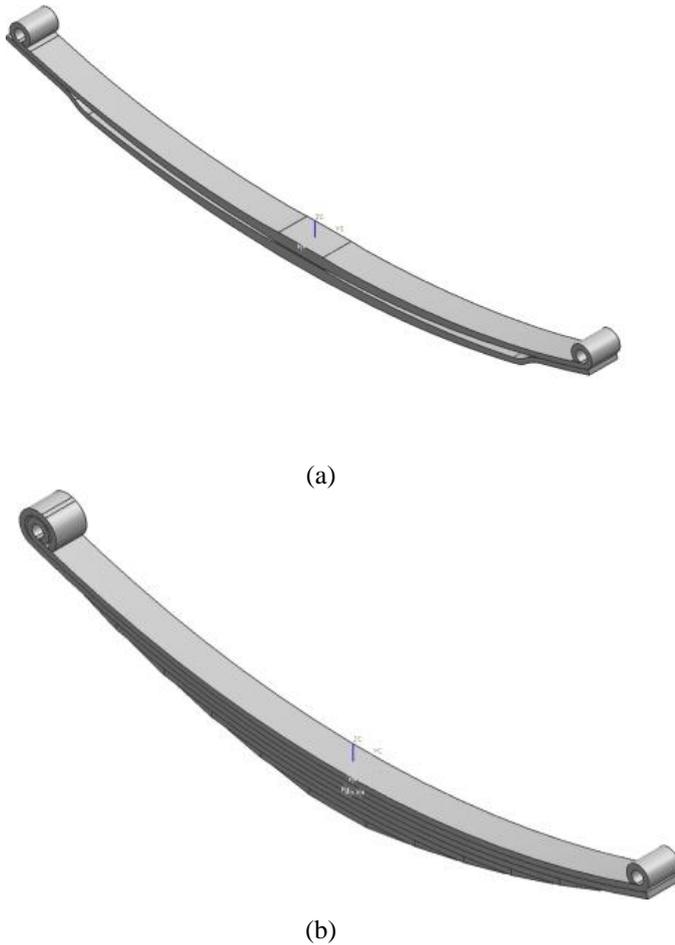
Geometry schematic of (a) multileaf spring and (b) parabolic spring
